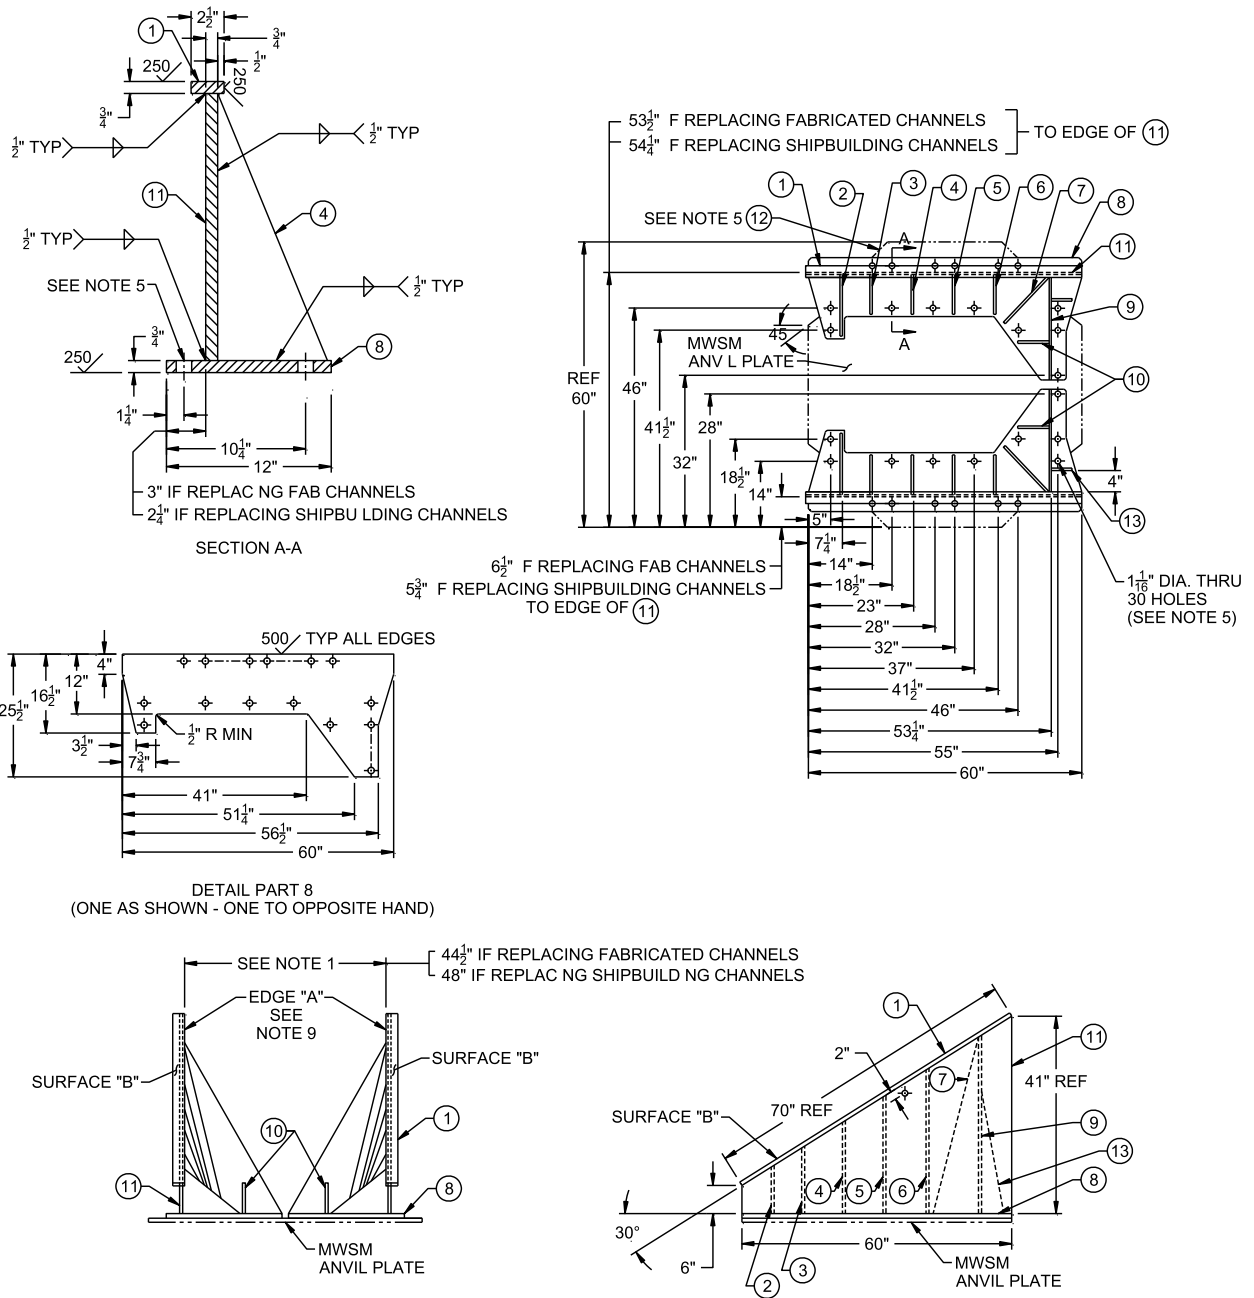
30-degree mounting fixture for testing base mounted equipment on the MWSM. (Sheet 1 of 2)
